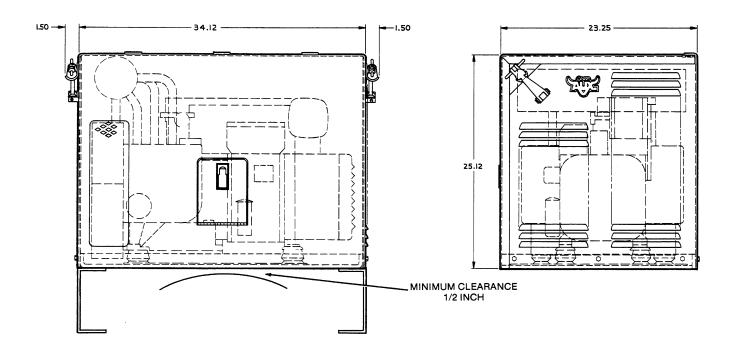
OVER-THE-RAIL MOUNTED COMPARTMENT INSTALLATION DIMENSIONS
